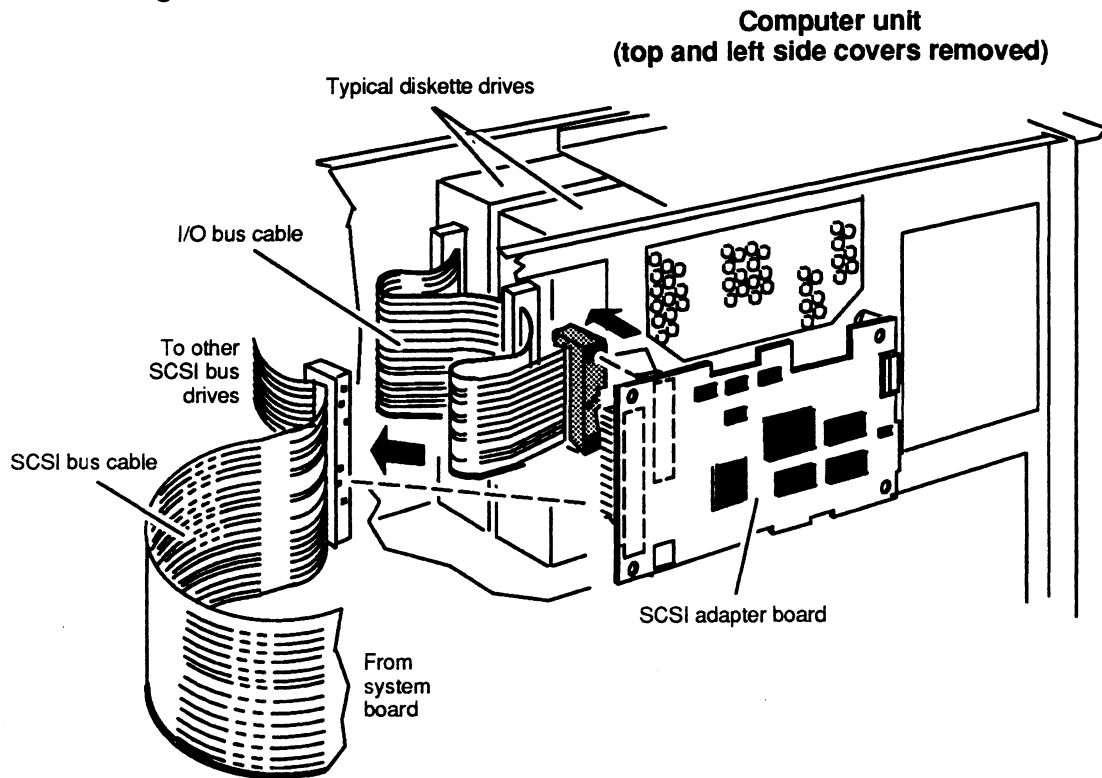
Unplugging the SCSI Bus and I/O Bus Cables from the SCSI Adapter Board
